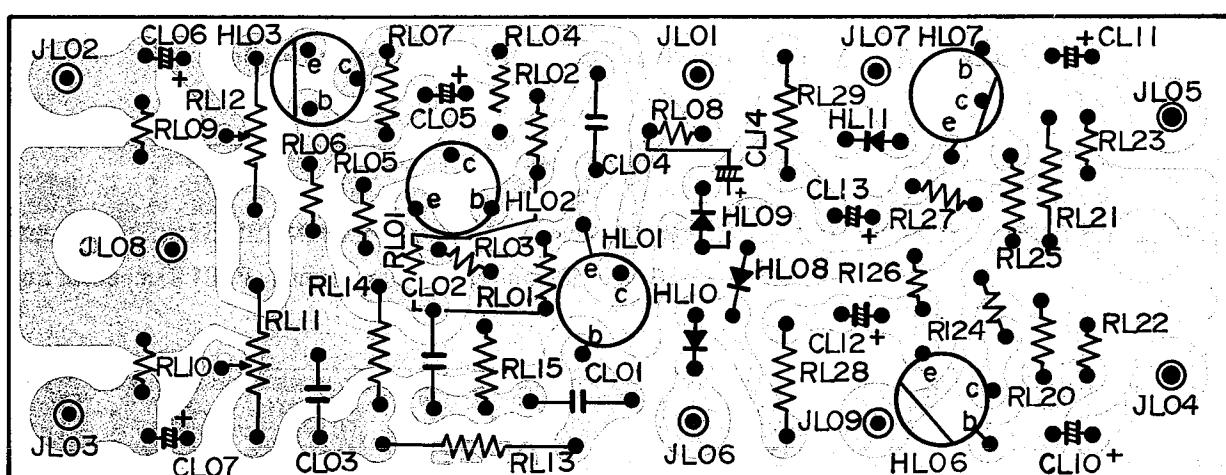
400Hz Oscillator and Meter Driver Assembly PL01 Component Locations
